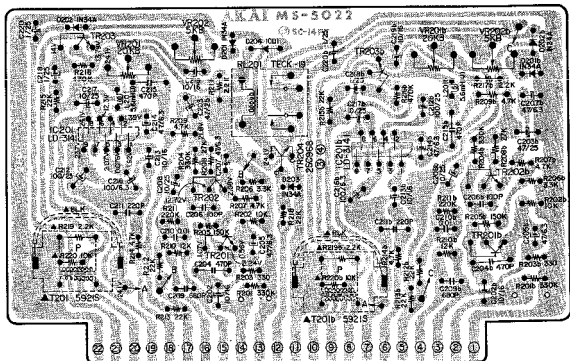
P.B. AMP. P.C. BOARD (Face Side)
